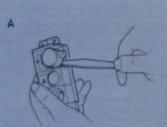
Instrument panel shroud switch disassembly September 1985 models onward (Sec 12)
